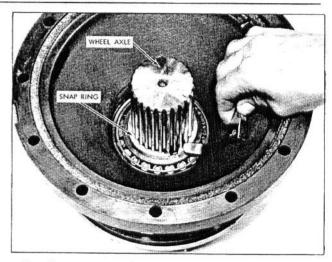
Measuring Gap Between Wheel Axle and Snap Ring
